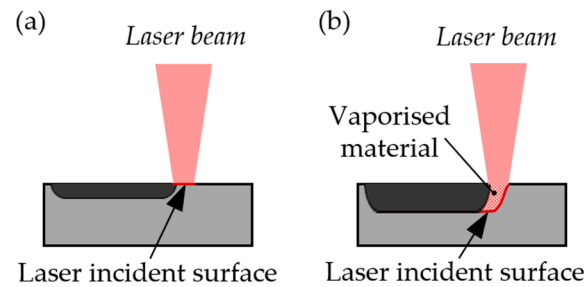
Laser incident surface: (a) conduction and (b) keyhole welding modes.
